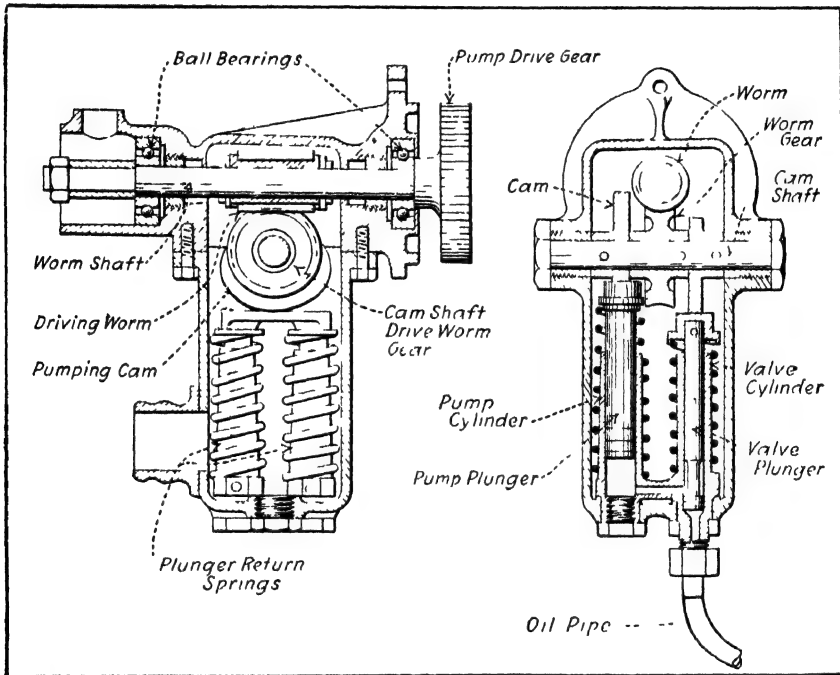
Sectional Views Showing Internal Construction of the Gnome Oil Pump.
